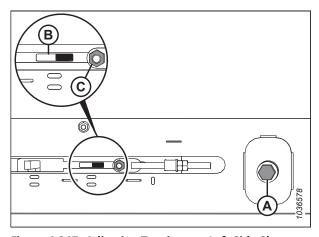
Adjusting Tensioner – Left Side Shown, Right Side Opposite
